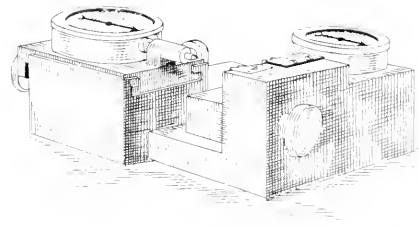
GAGE WITH DIAL INDICATOR READINGS
